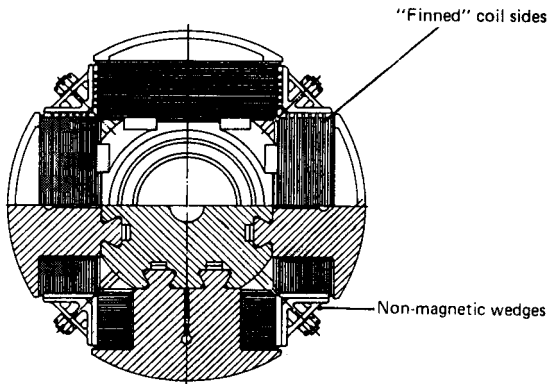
A typical sectional arrangement of a solid pole rotor
